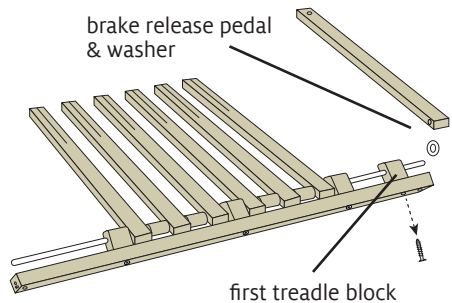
REMOVE WASHER, BRAKE RELEASE PEDAL, AND TREADLE BLOCK
